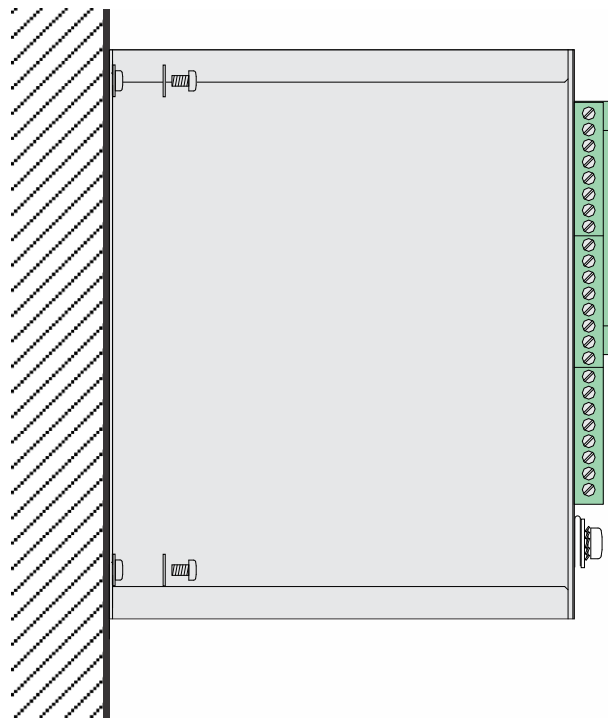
Mounting of the device without LDU in the cabinet on the rear panel
